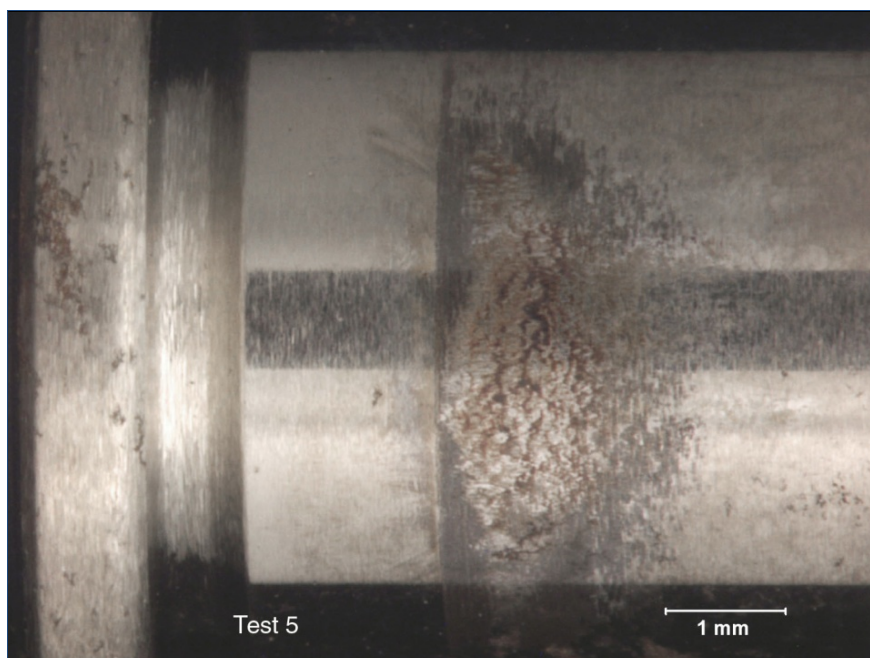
AF7938 50/50 JP-8/HRJ, Lower Hydraulic Coupler Piston, Wear Scar Close Up
